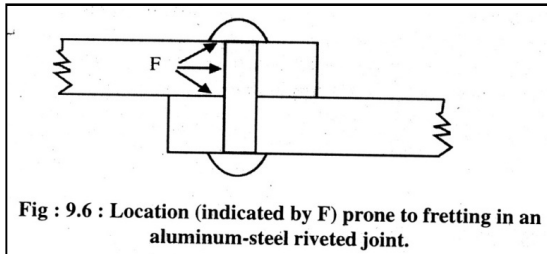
Location (indicated by F) prone to fretting in an aluminum-steel riveted joint.
